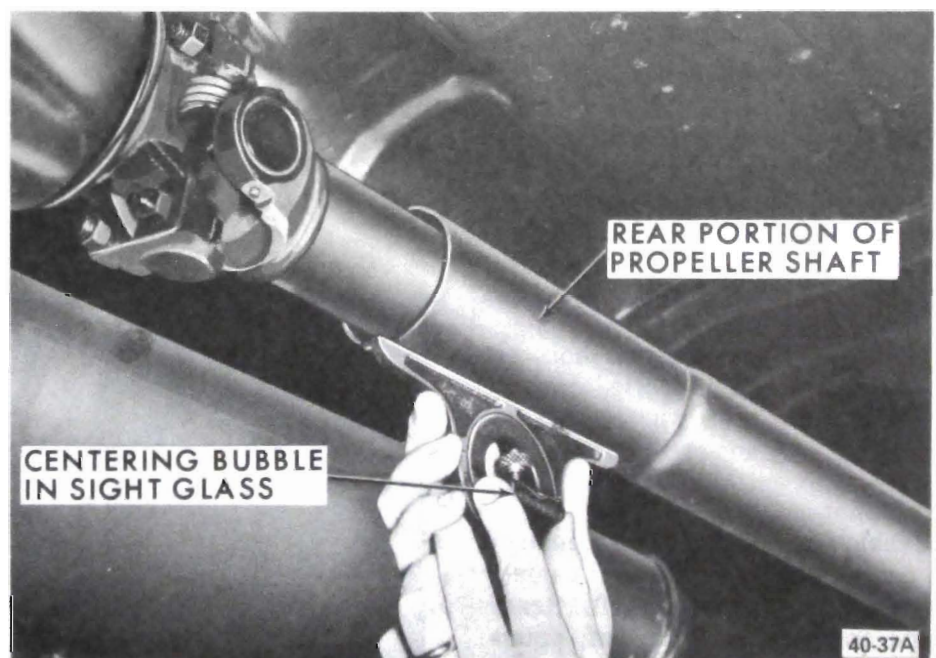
Measuring Angle at Rear of Propeller Shaft
